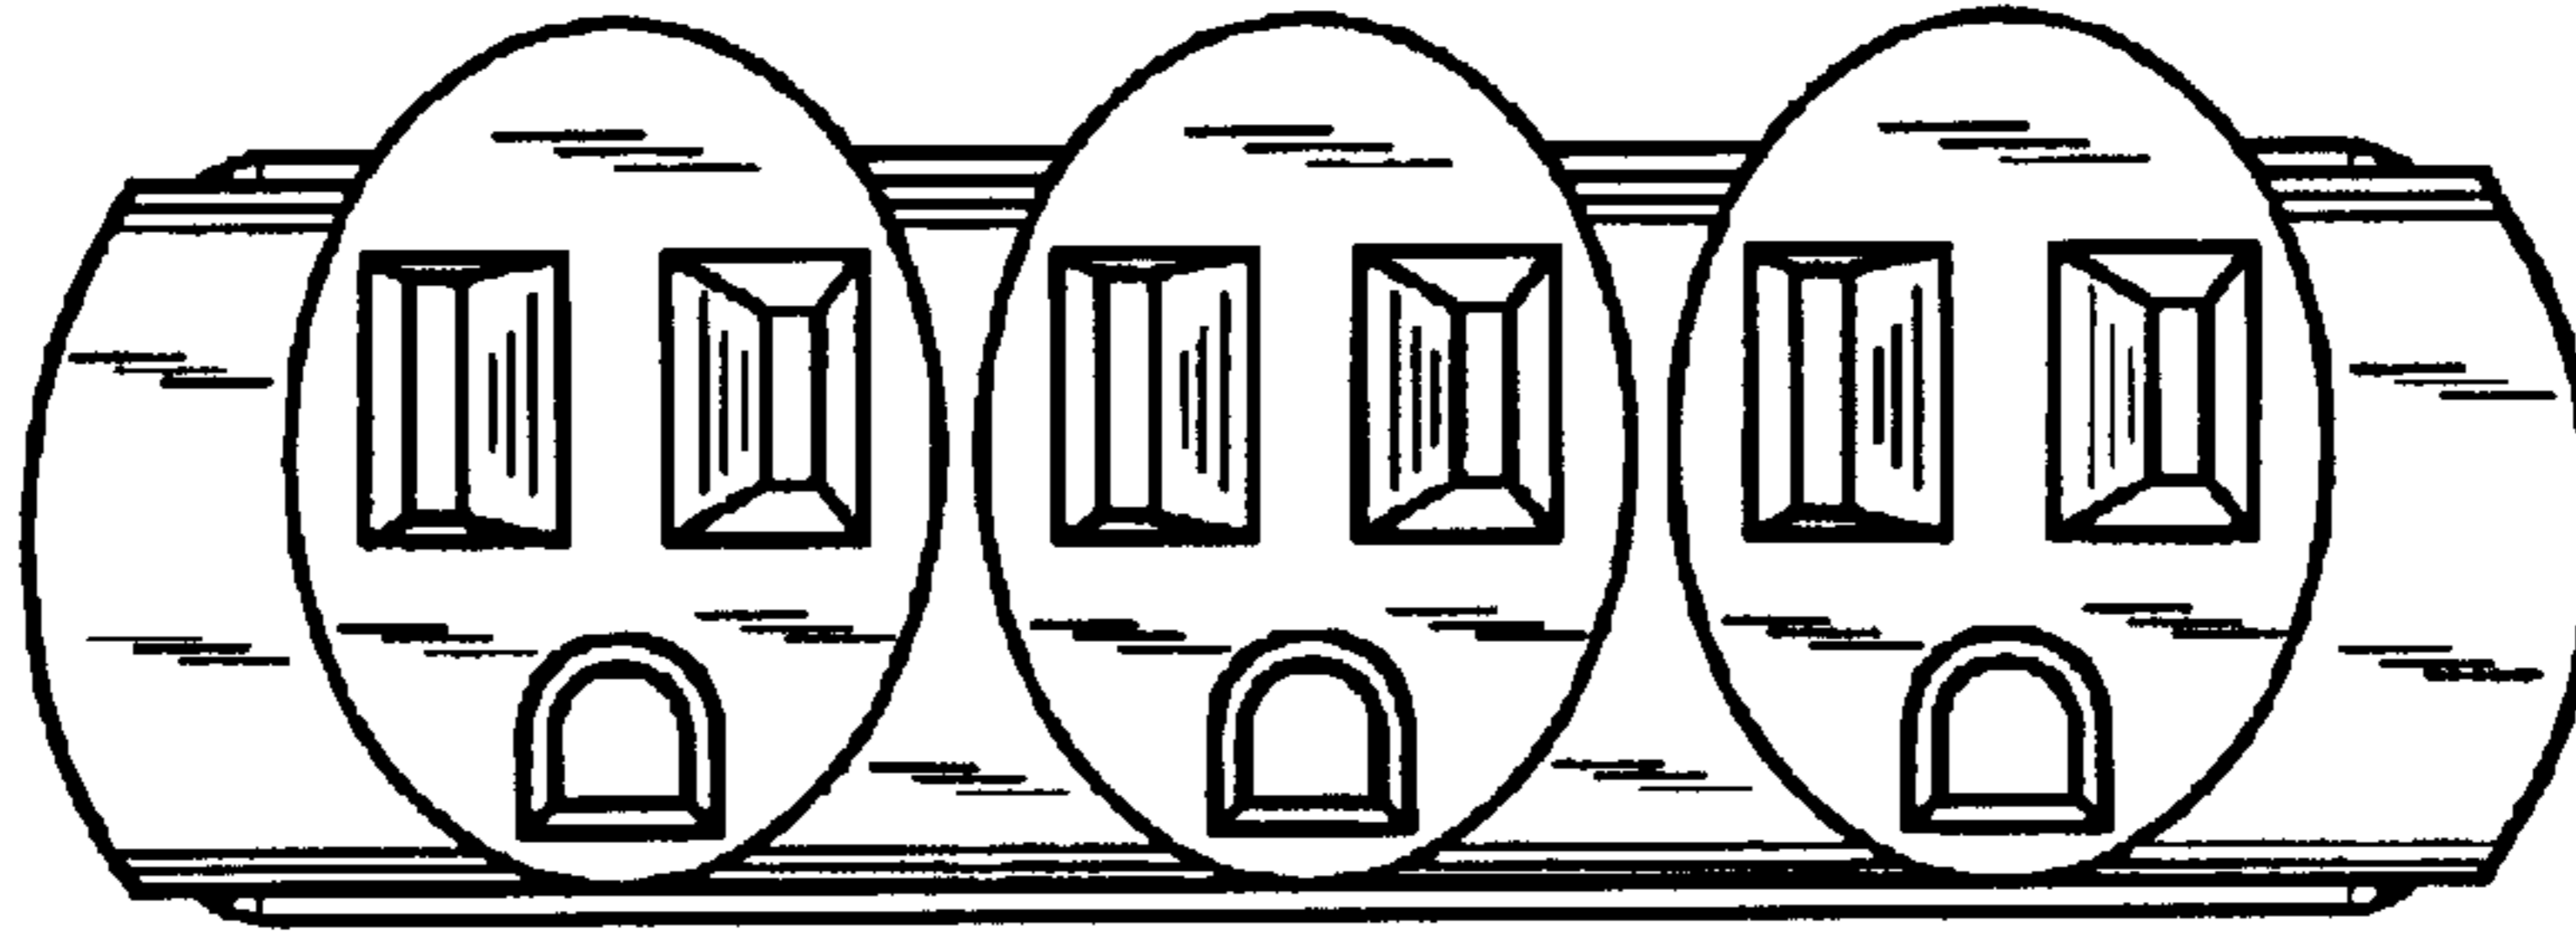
is a left side elevational view of the electrical plug illustrated in FIG. 1; and,
